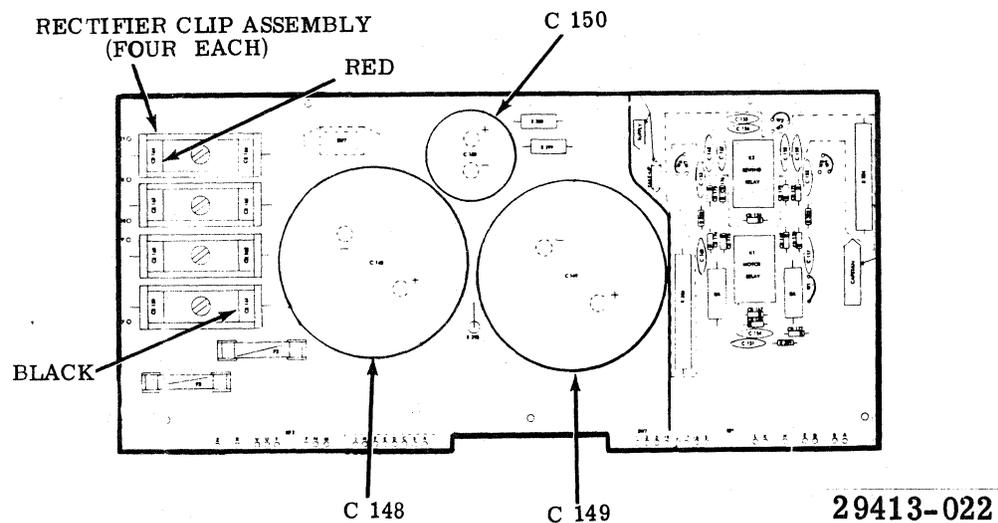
RP-16 Rectifier and Filter Capacitor Replacement.
